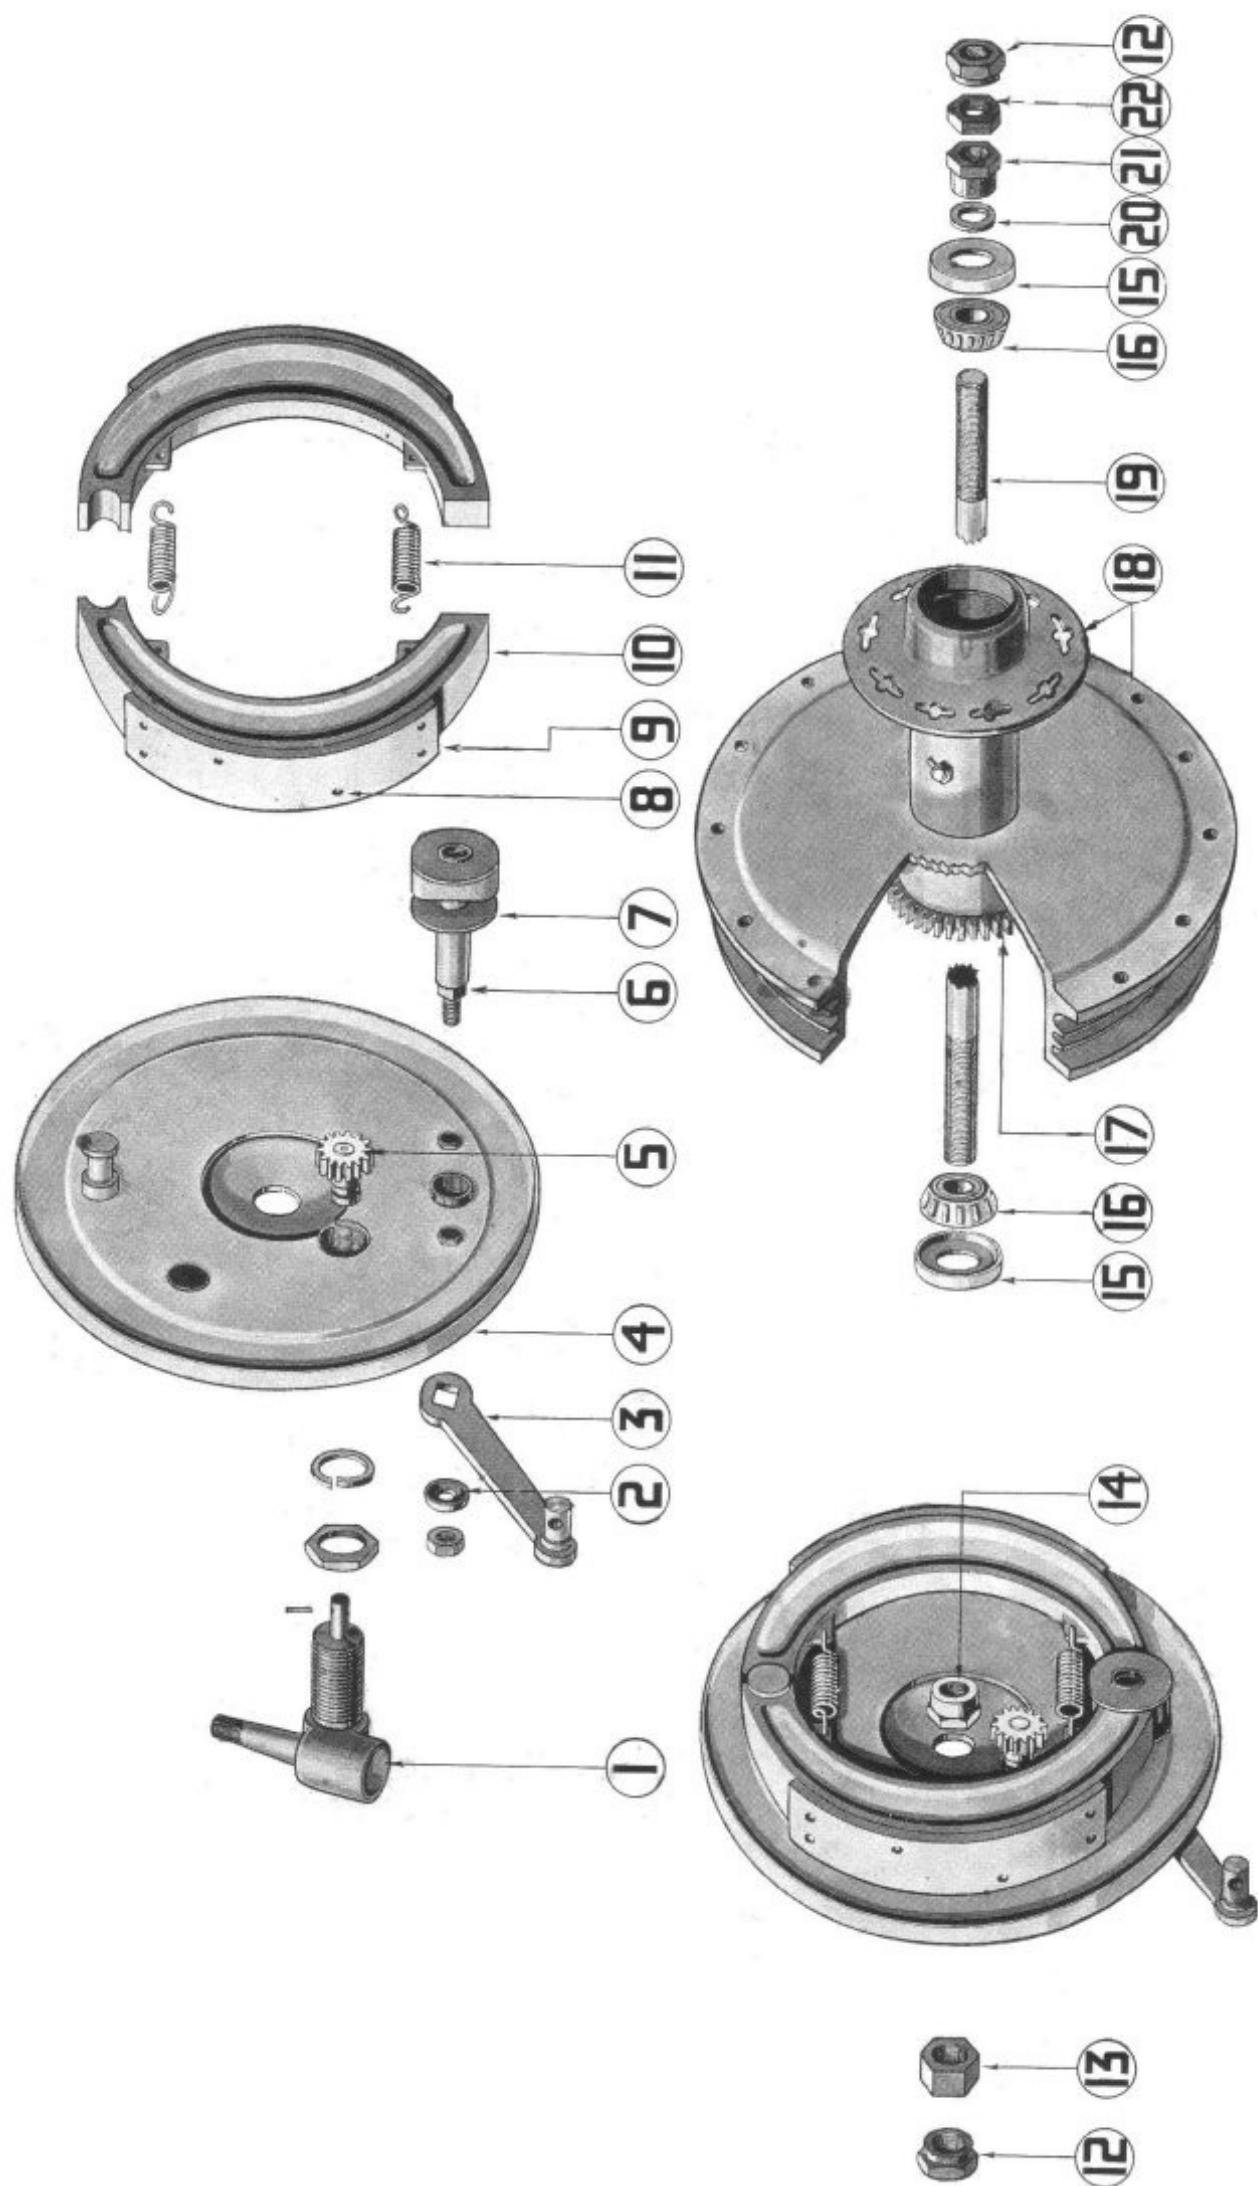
Exploded View of Front Hub and Brake Assembly.
